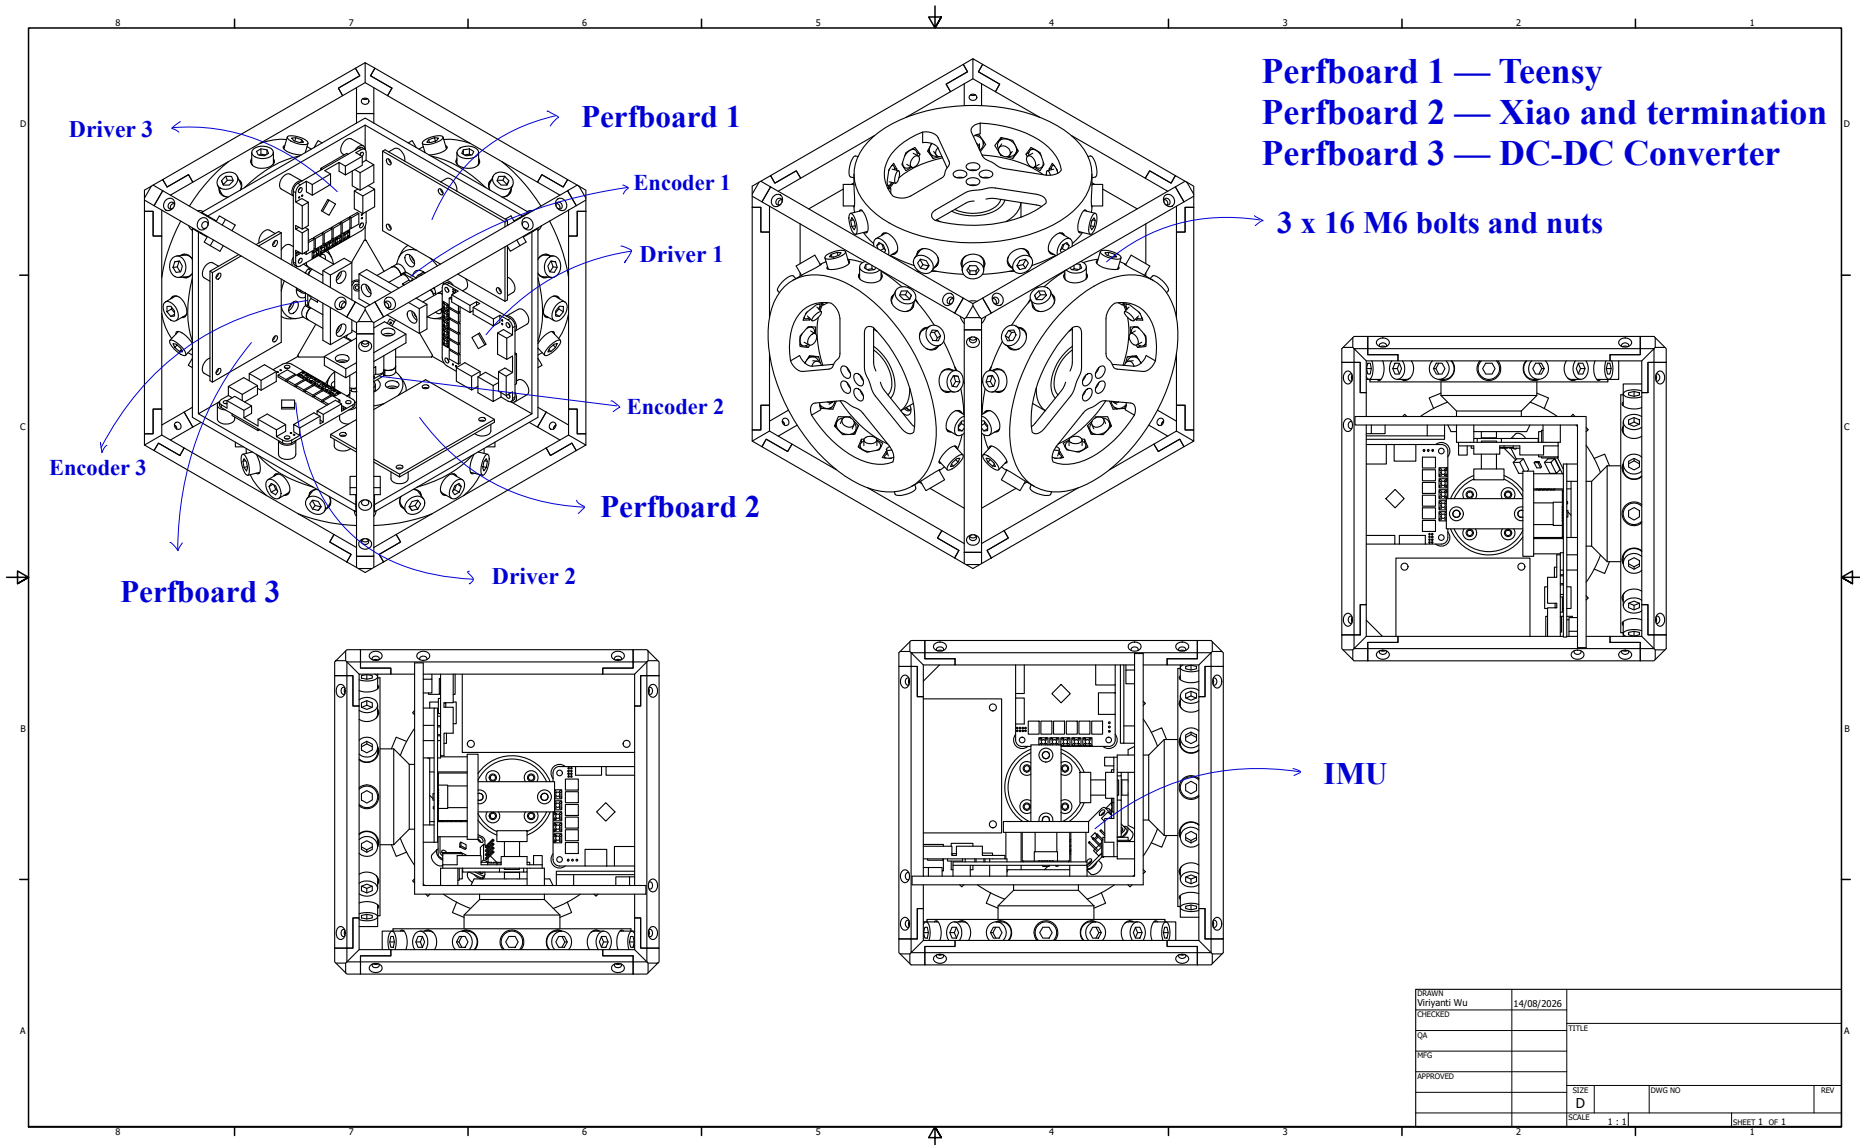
General-assembly drawing of the three-axis cube — the final released design of the flight article — sheet 1 of 1 at 1:1, with the electronics package called out per Section 6.6. Upper left: isometric cutaway of the inner structure, labelling the three motor drivers (Driver 1–3), the three encoder boards (Encoder 1–3) and the three perfboard assemblies (Perfboard 1: Teensy flight controller; Perfboard 2: Xiao and termination; Perfboard 3: DC-DC converter). Upper centre: isometric view of the closed assembly, showing the three orthogonal reaction-wheel modules through the open frame faces and the 3 × 6 M6 ballast bolt-and-nut set. Right: front elevation in section of a single motor/wheel module, locating the IMU in the inner structure. Lower left and lower centre: front orthographic views of two face modules, giving the motor bolt circle and the corner fastener pattern of Table 15.
